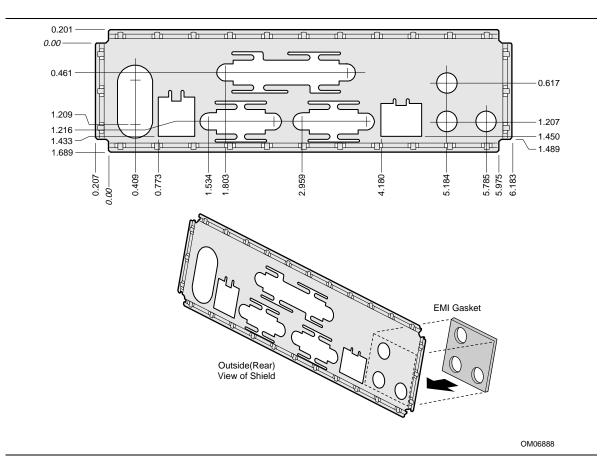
Back Panel I/O Shield Dimensions (ATX Chassis-Independent)
